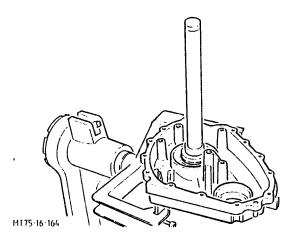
Fit transmission mainshaft transfer box radial oil seal using Special Tool 16-054.
